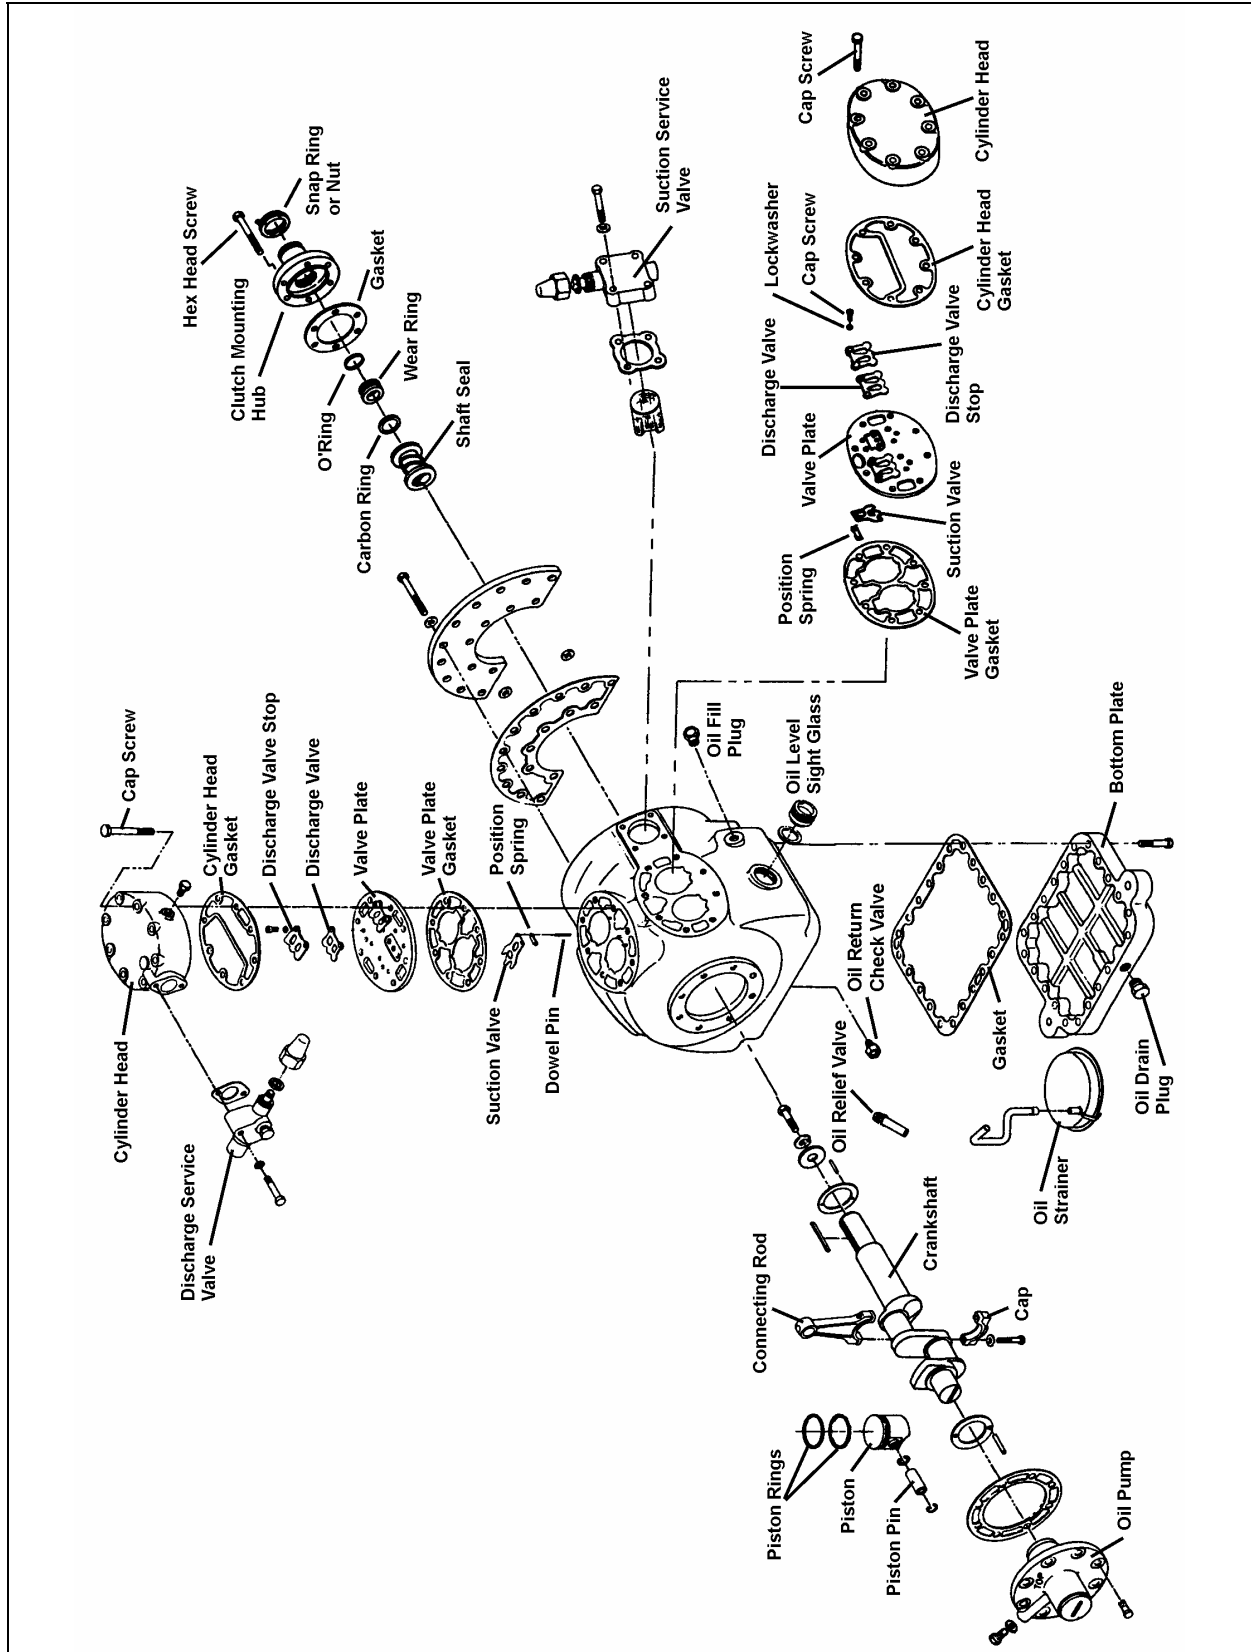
EXPLODED VIEW OF 05G COMPRESSOR
